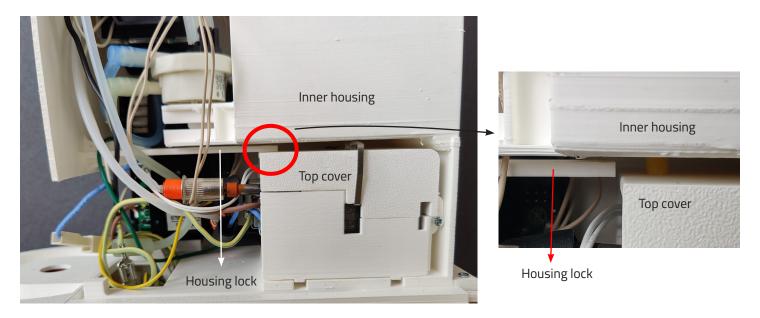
Section view of the prototype showing the housing lock sandwiched between the boiler top cover and the inner housing (left). To illustrate the pin's role, the outer housing has been pulled away to reveal the pin passing from the top cover to the inner housing. (right)
